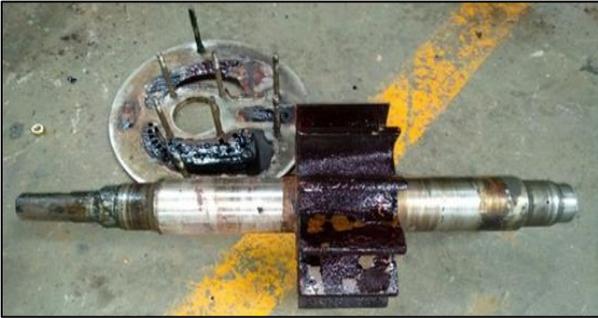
(Damaged Impeller Blades by Chemical)
